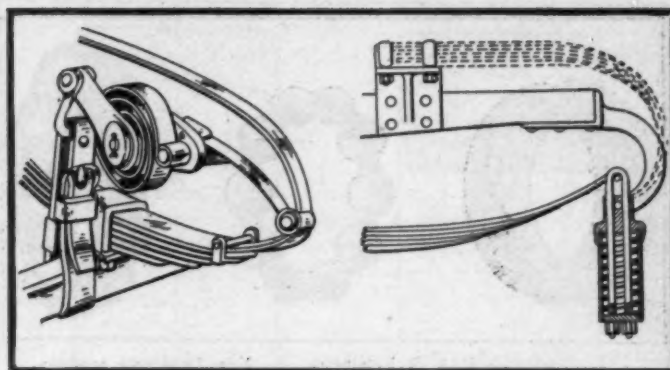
Skinner recoil check. Fig. 13—Section of J-M shock absorber
